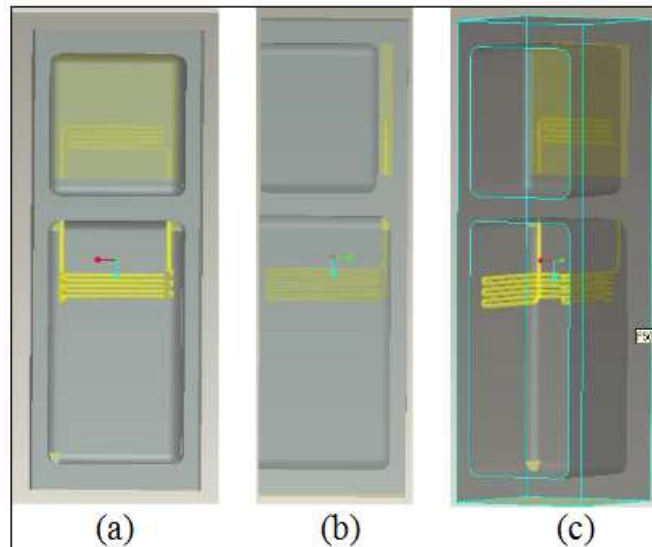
(a) Front view, (b) Side view, (c) Isometric view of refrigerator with NCL
